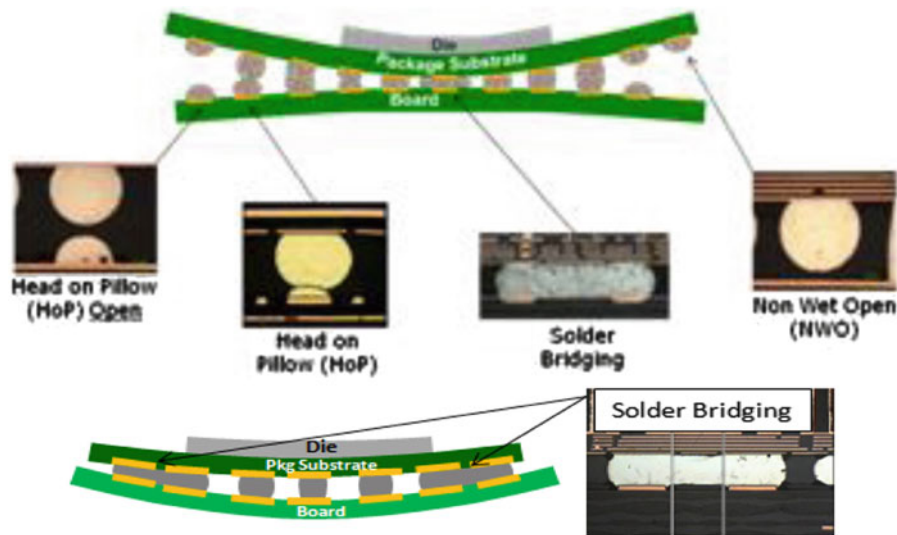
Various soldering defects observed due to PCB warpage
